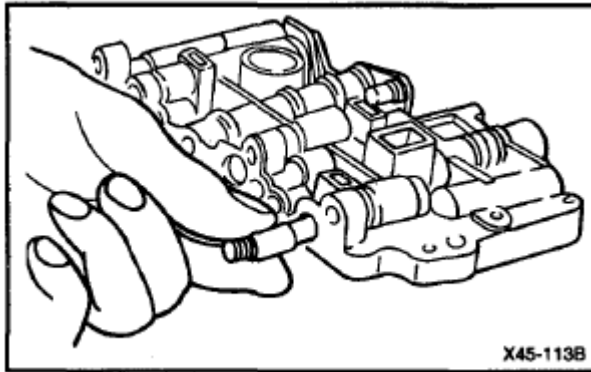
Removing/Installing Pressure Control Spring & Pressure Control Valve
